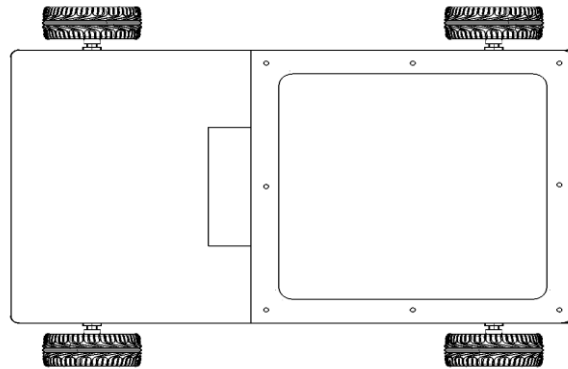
Design of Robot Bottom Plate Traveling Mechanism
